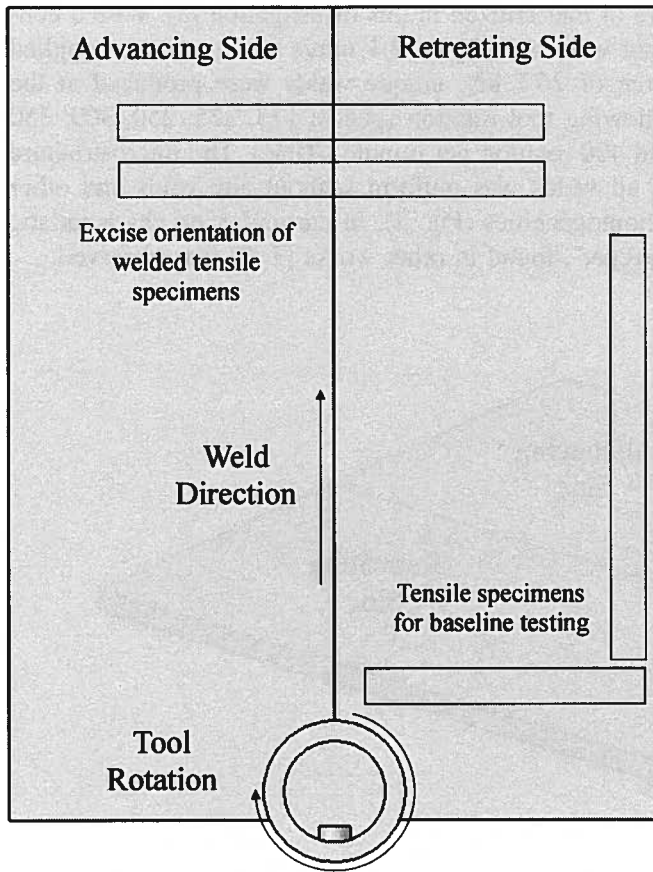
Excise location of tensile specimens and corrosion coupons from FSW panels
